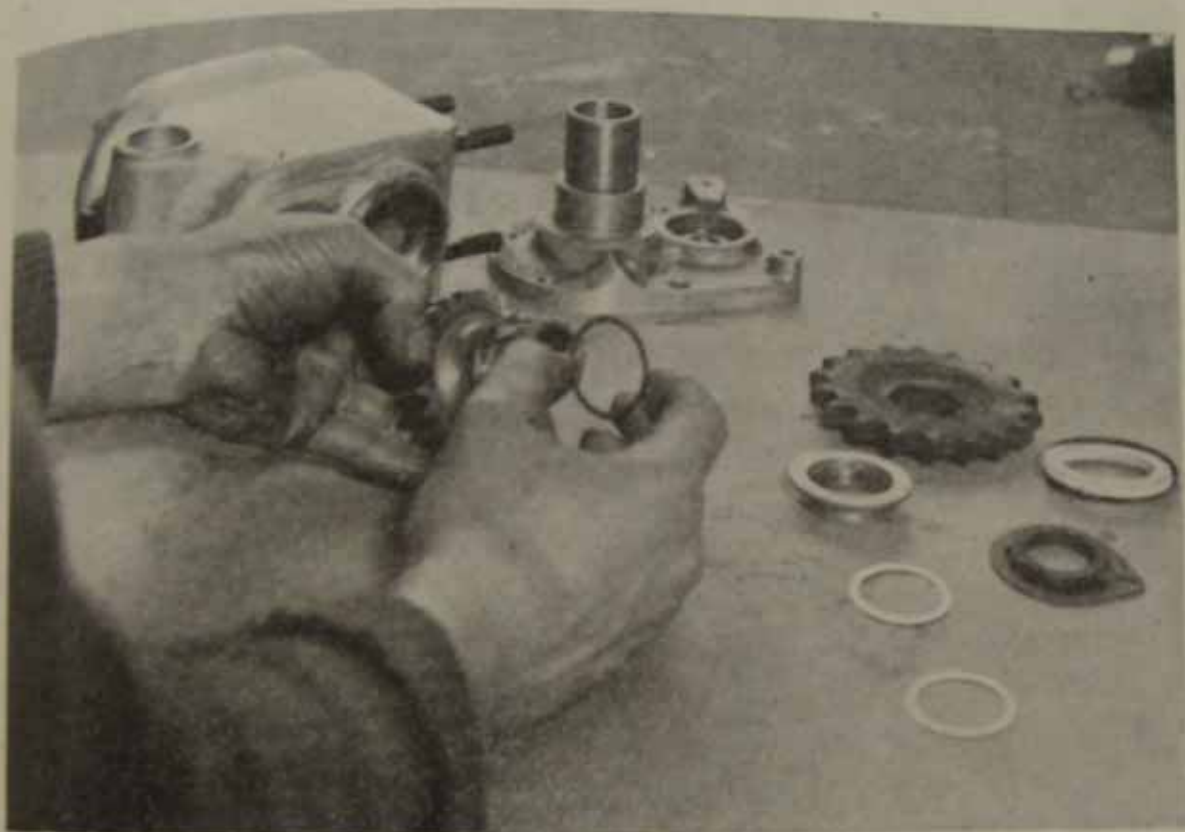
WASHERS USED FOR ADJUSTING THE DOUBLE BALL BEARINGS WHICH SUPPORT THE MAIN GEAR WHEEL.
